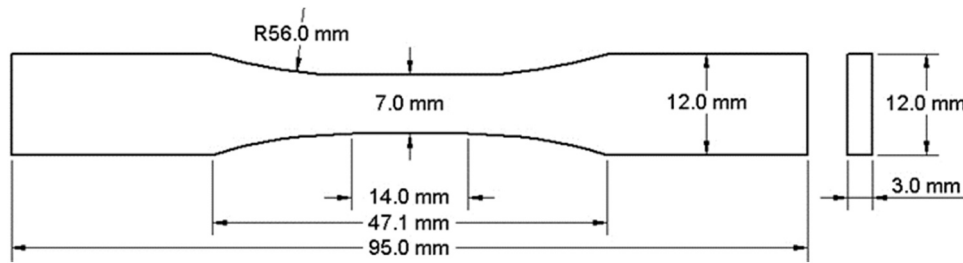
The design and dimensions of fatigue specimens based on ASTM E466 [48], the standard test method for force-controlled fatigue testing.
